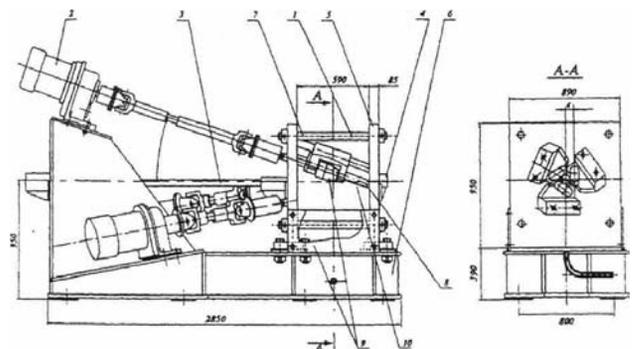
Three - high skew rolling mill [5], 1 - Working stand, 2 - Primary engine, 3 - Entry guide, 4 - Stripper guide, 5 - Steel plate, 6 - Base, 7 - Distance screws, 8 - Cassettes, 9 - Working rolls, 10 - Thrust bearing
